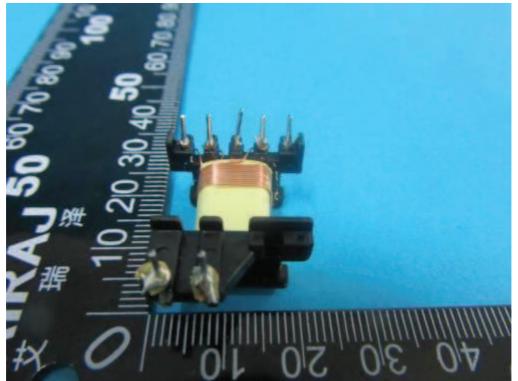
Detail view of transformer (for 90E12PU05-xxxx)
